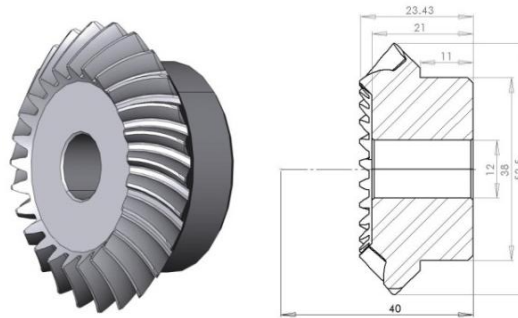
Spherical miter gear nominal dimensions [mm]. The 40 [mm] represents the mounting distance which is how far the gear should be from the center of the mating gear.
